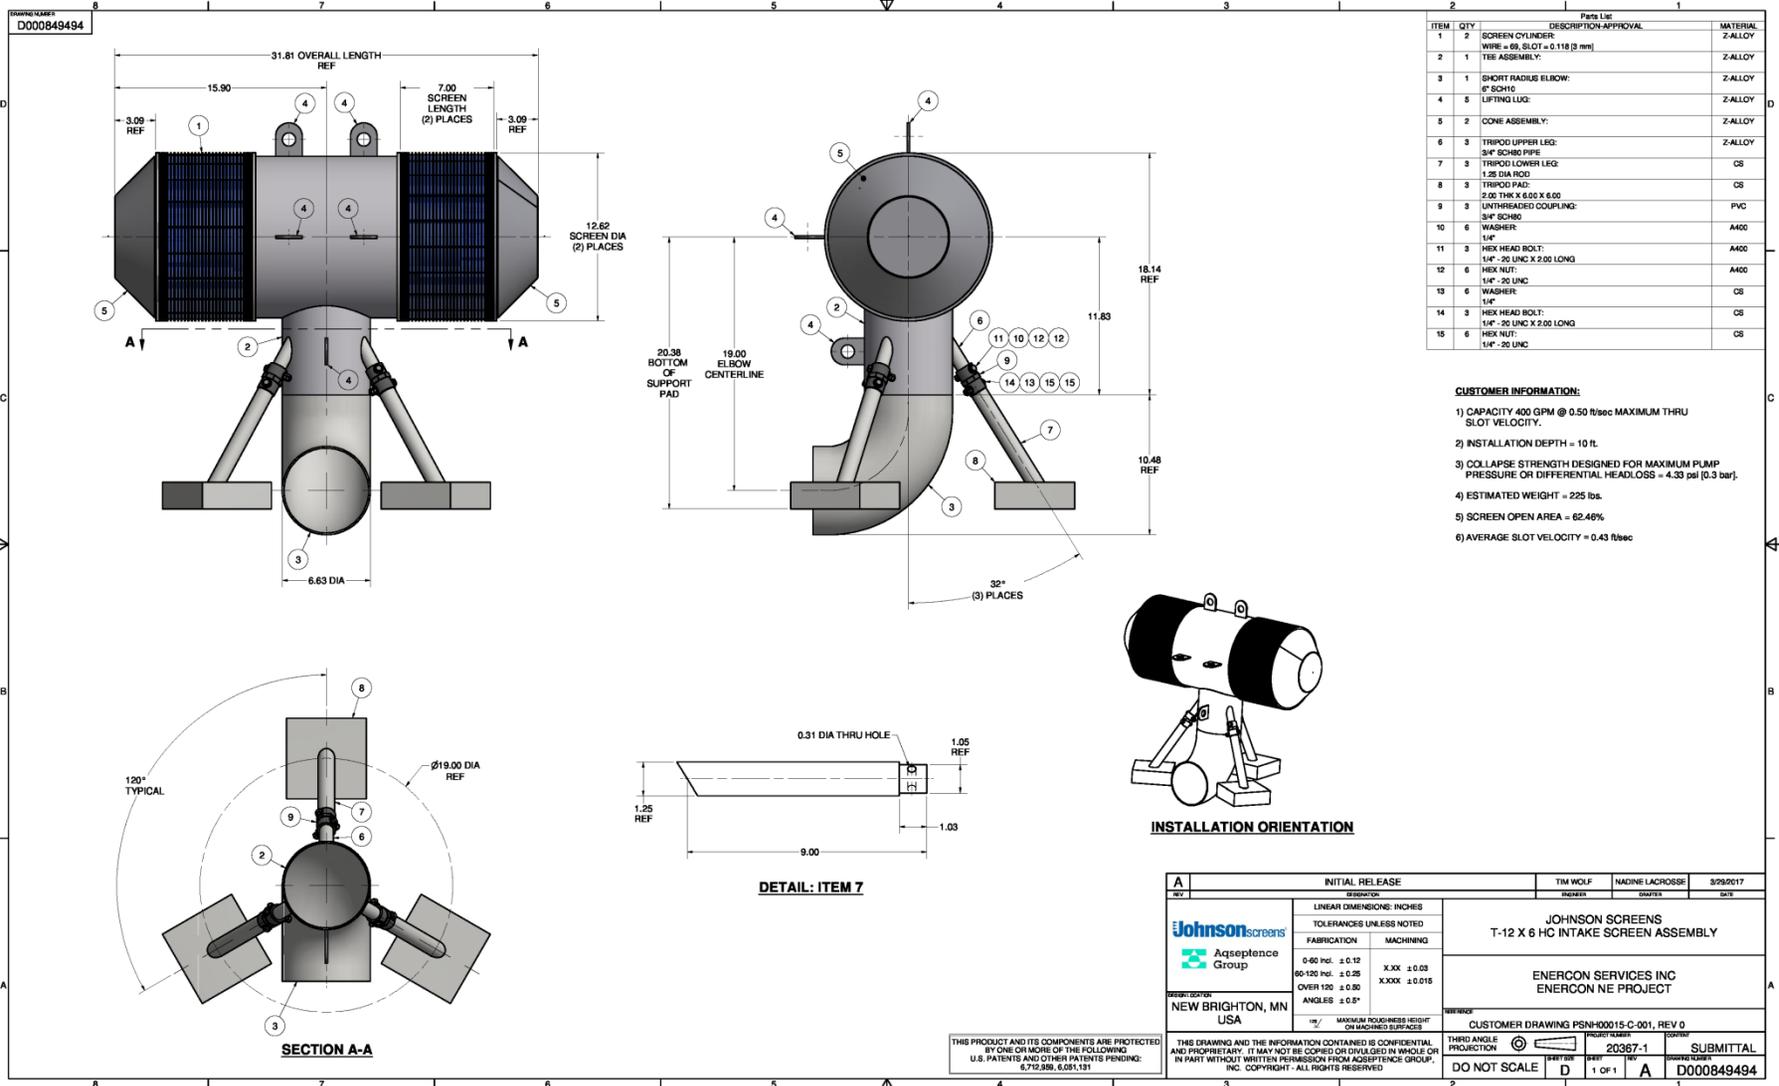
Engineering drawing showing the 3-mm wedgewire test screen and tripod mount for Merrimack Station Unit 1.
